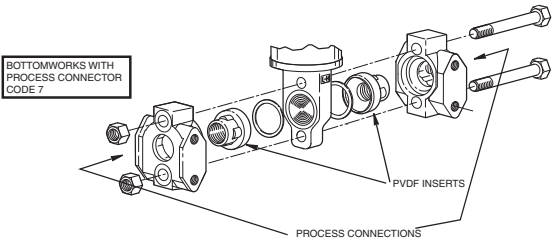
Replacing the Sensor Assembly (pvdf Inserts)
